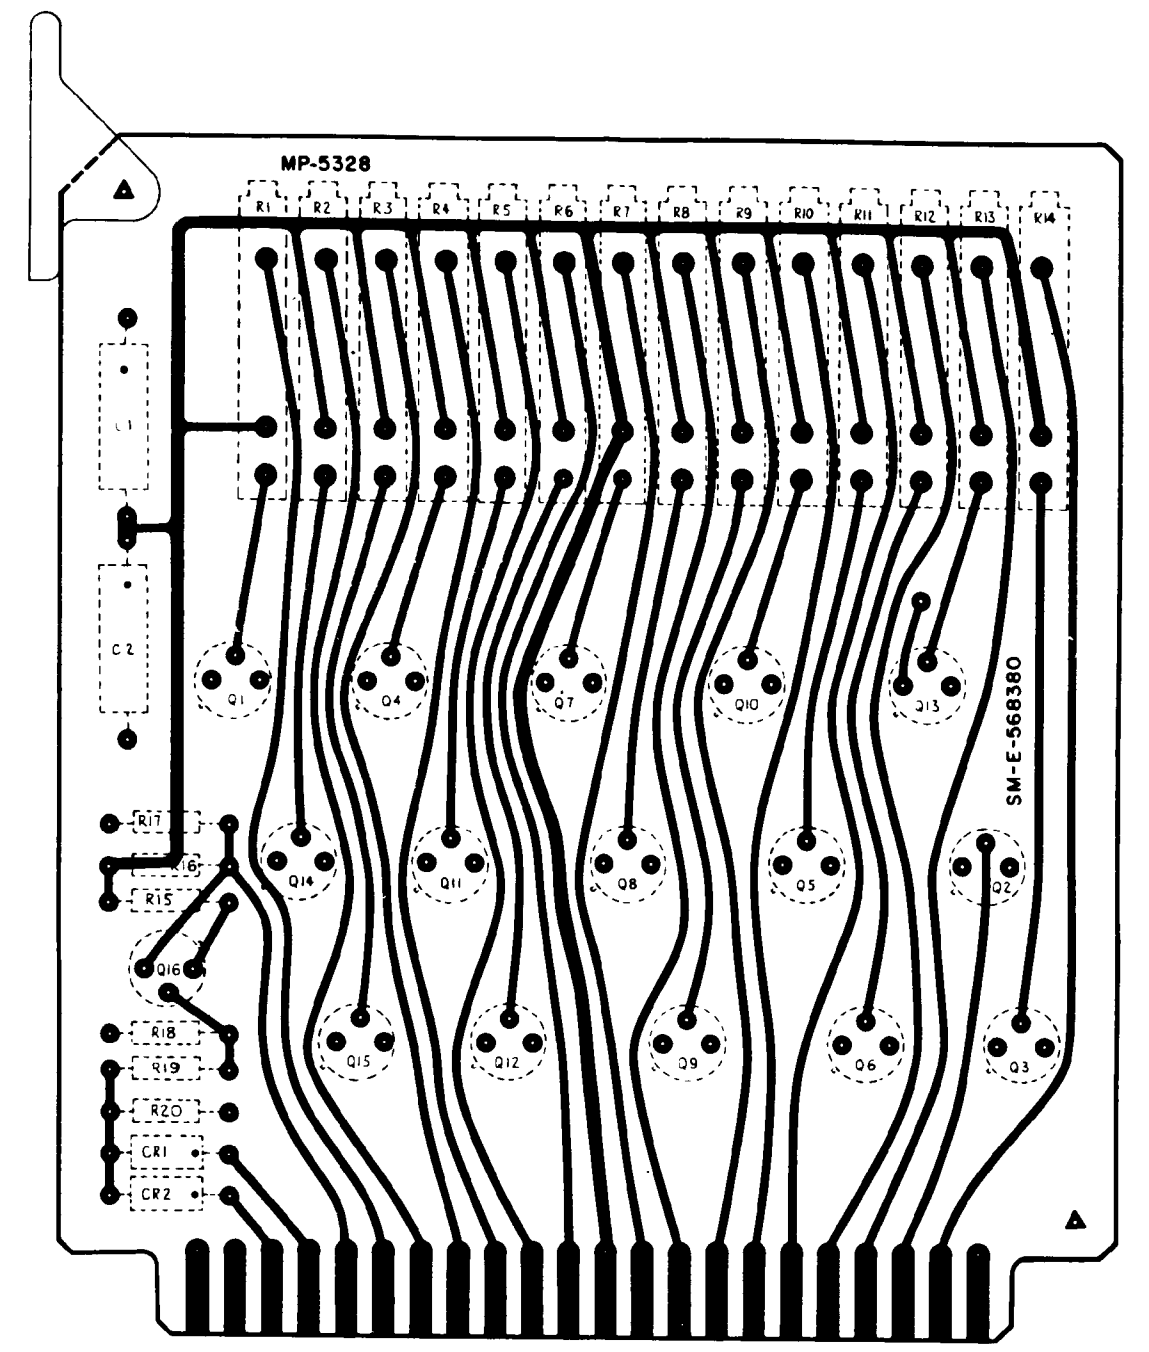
Decoder module A7, wiring diagram and parts location.
